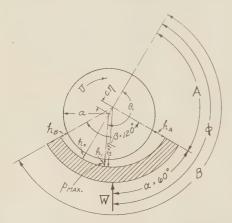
Geometrical Representation of 120-Deg Centrally Supported Journal Bearing With Running Clearance
